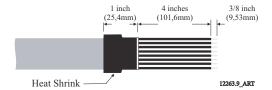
Clutch/Troll Cable Heat Shrink in Processor
